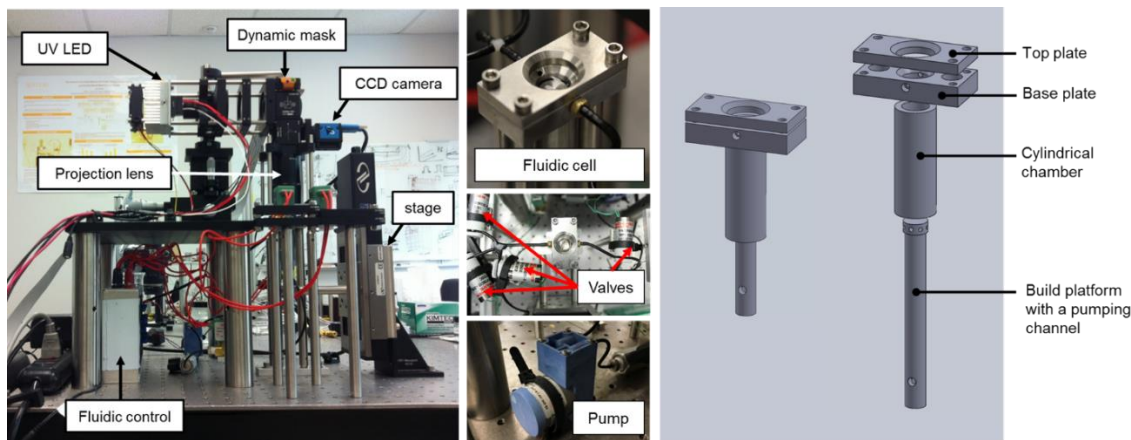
The photographs of multi-material projection micro-stereolithography (MM-P μ SL) and a detailed design drawing of fluidic cell
